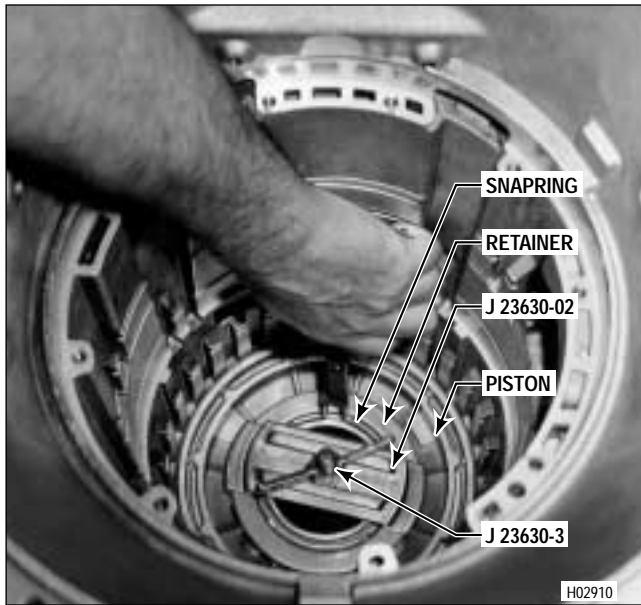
Removing First Clutch Spring Retainer Snapring
